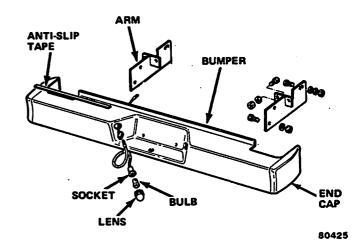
F-22 Rear Step Bumper—Scrambler and Truck Medels
